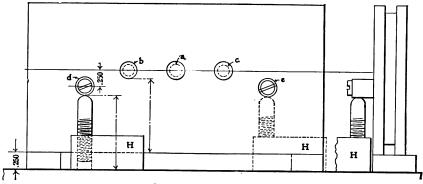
SETTING THE BUTTONS ON A MASTER PLATE
